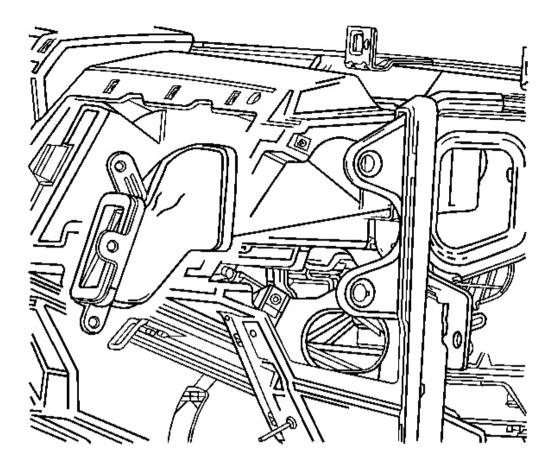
RH Air Outlet Duct & Screws Courtesy of GENERAL MOTORS CORP.
